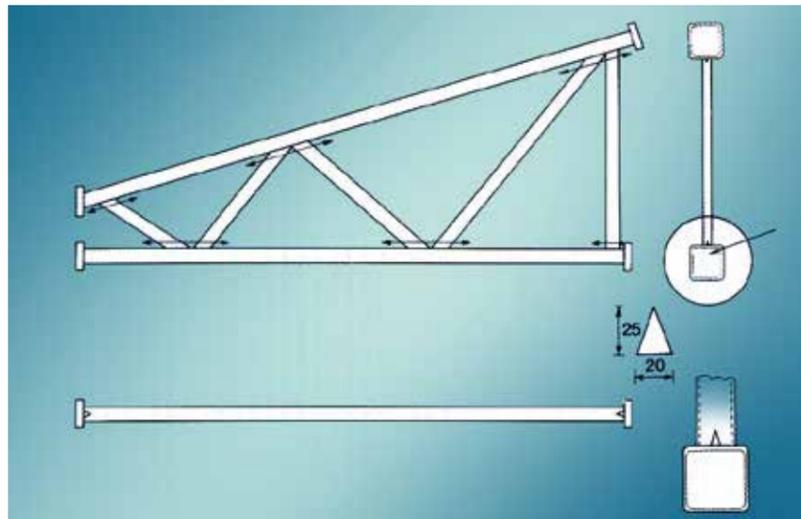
In welded structures venting holes must be inserted at all junctions. The holes must enable the zinc to run in and out freely. Closed tubes incur the risk of explosion!
